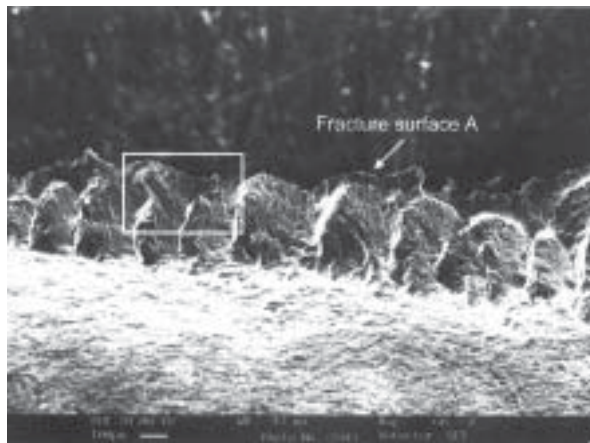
SEM fractograph of the crack shown in Fig. 13.
